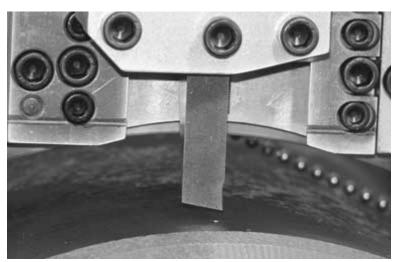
The tip of the beveling tool should be about 1/8" (3 mm) from the pipe surface.
